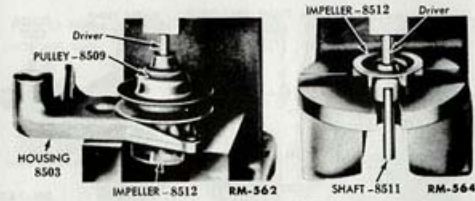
Removing Pulley From Pump Shaft (Bushing Type)
